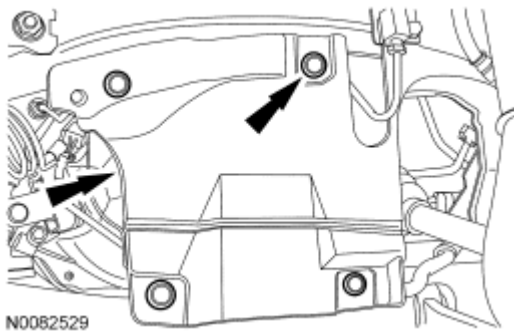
Locating Pin-Type Retainers & LH Splash Shield
